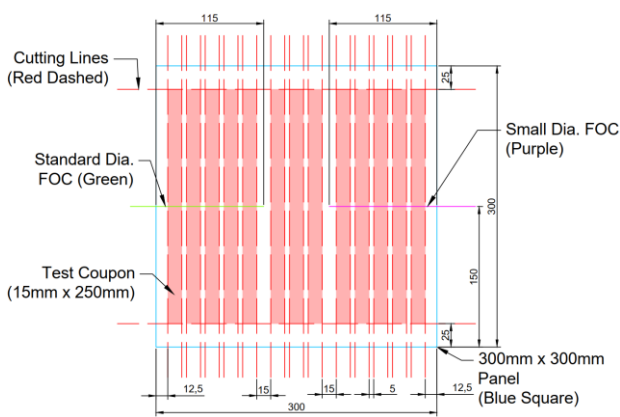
Perpendicular Panel Test Coupon Layout (units mm)
